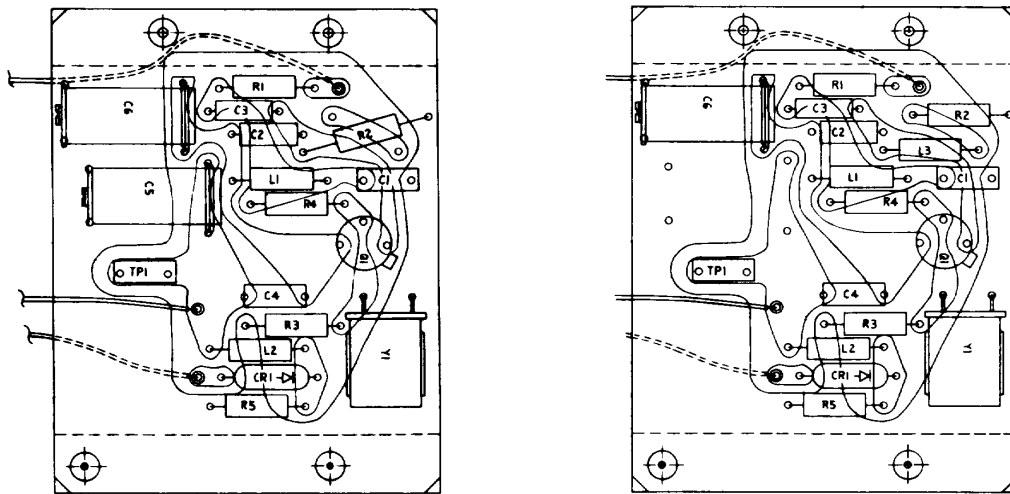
Generator Coupler Assembly (A1A1A4), Component Locations
